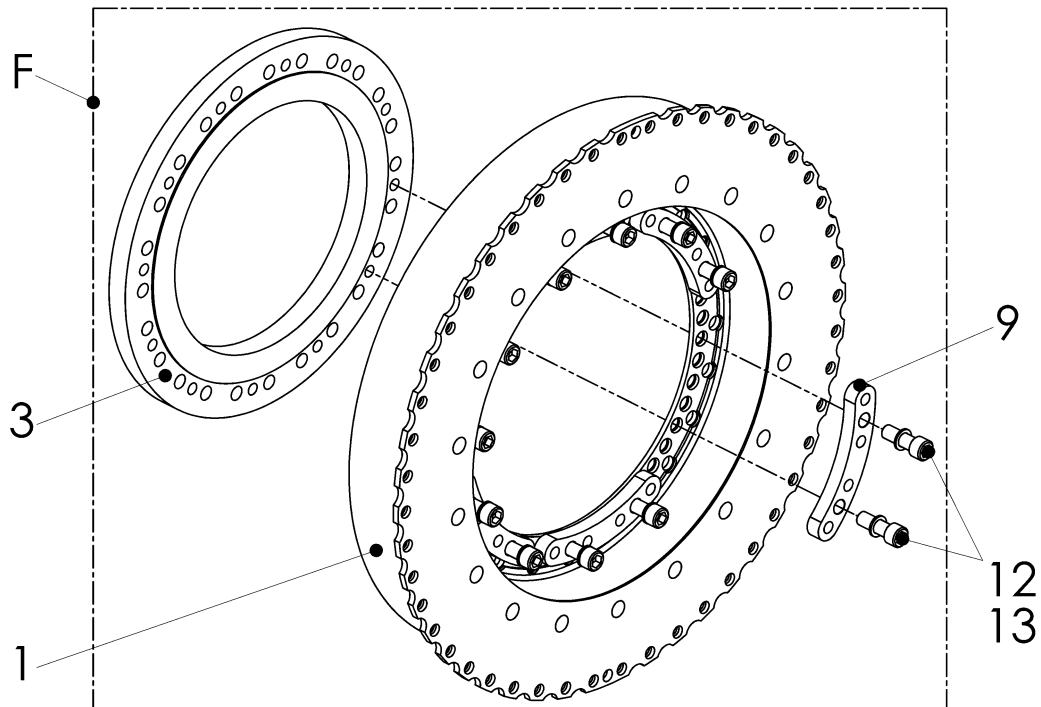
Dismantling the rubber element assembly of the coupling size 80
